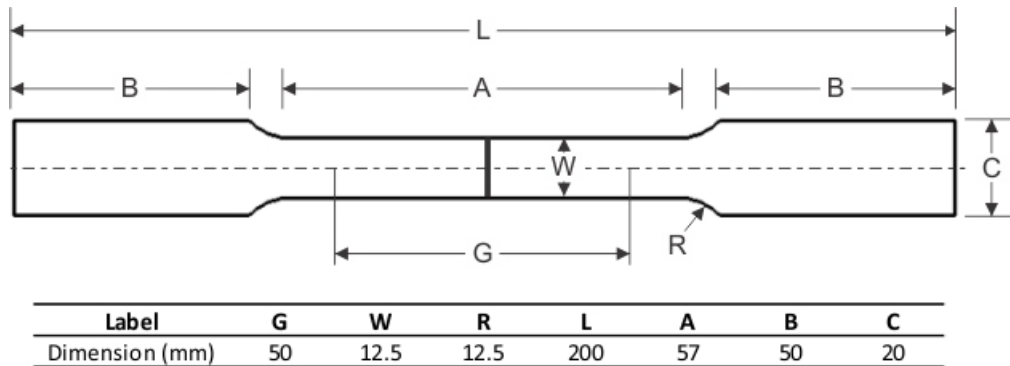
Standard size uni-axial tensile specimen dimensions
